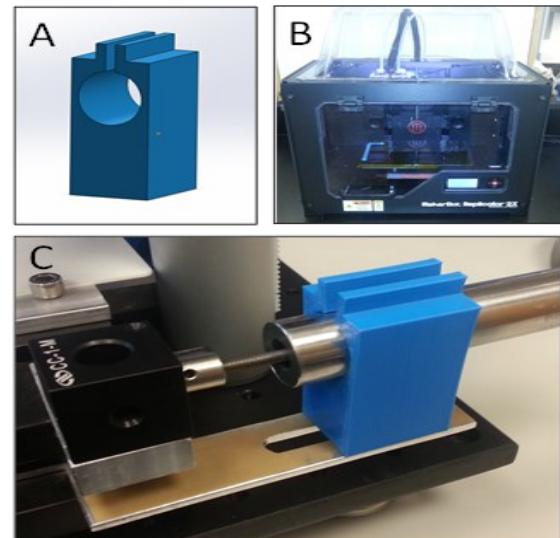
Development in CAD (A), manufacture (B), and use (C) of part that requires precise alignment and tolerancing that was manufactured with the 3-D printer.
